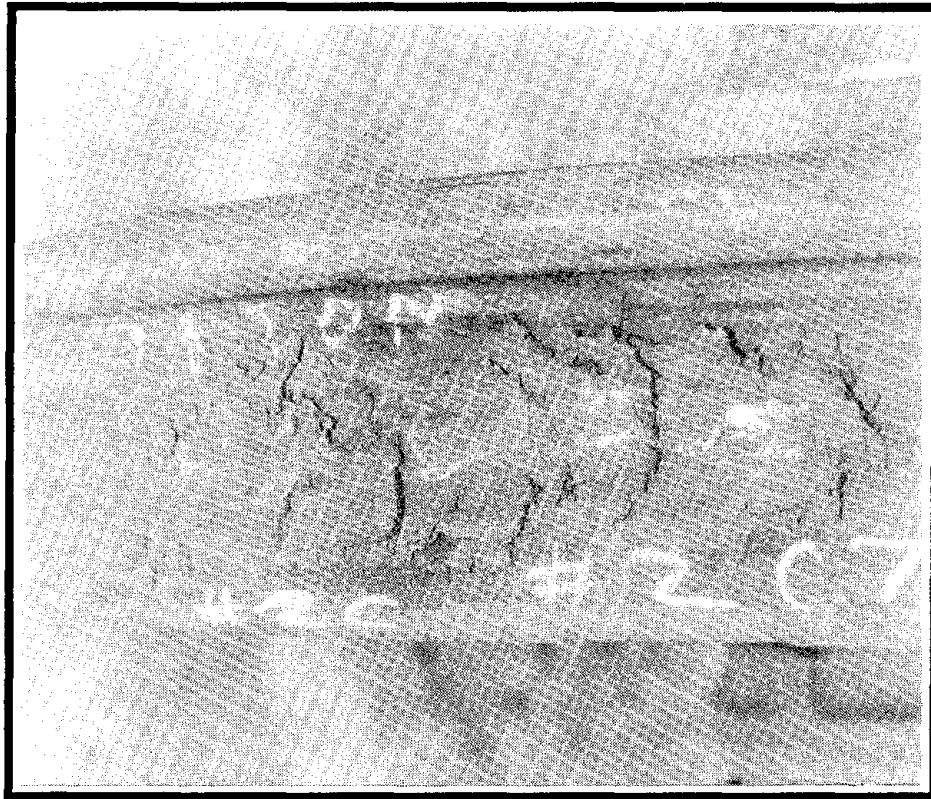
Wheel Tread Build-up Defect -- Left Wheel
